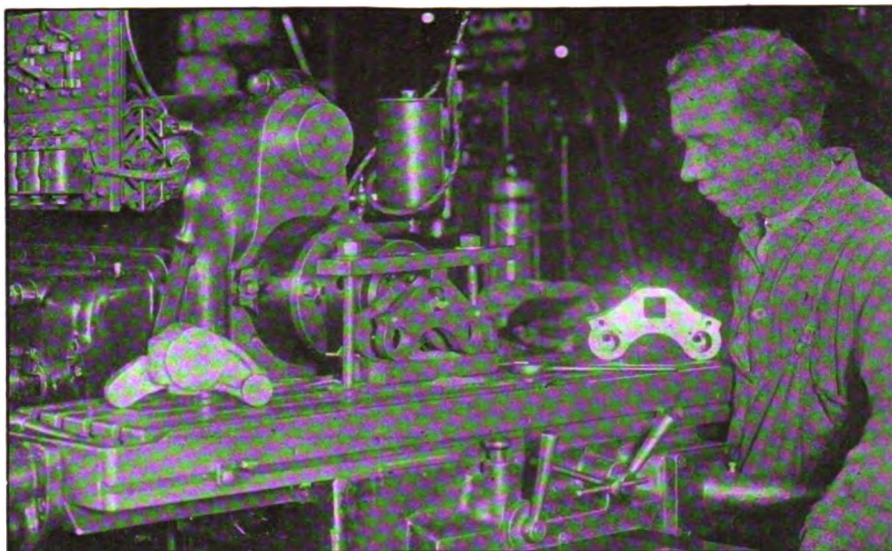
SQUARE HOLE DRILLING ATTACHMENT ON MILLING MACHINE CUTTING SQUARE HOLES WITH ROUNDED CORNERS
